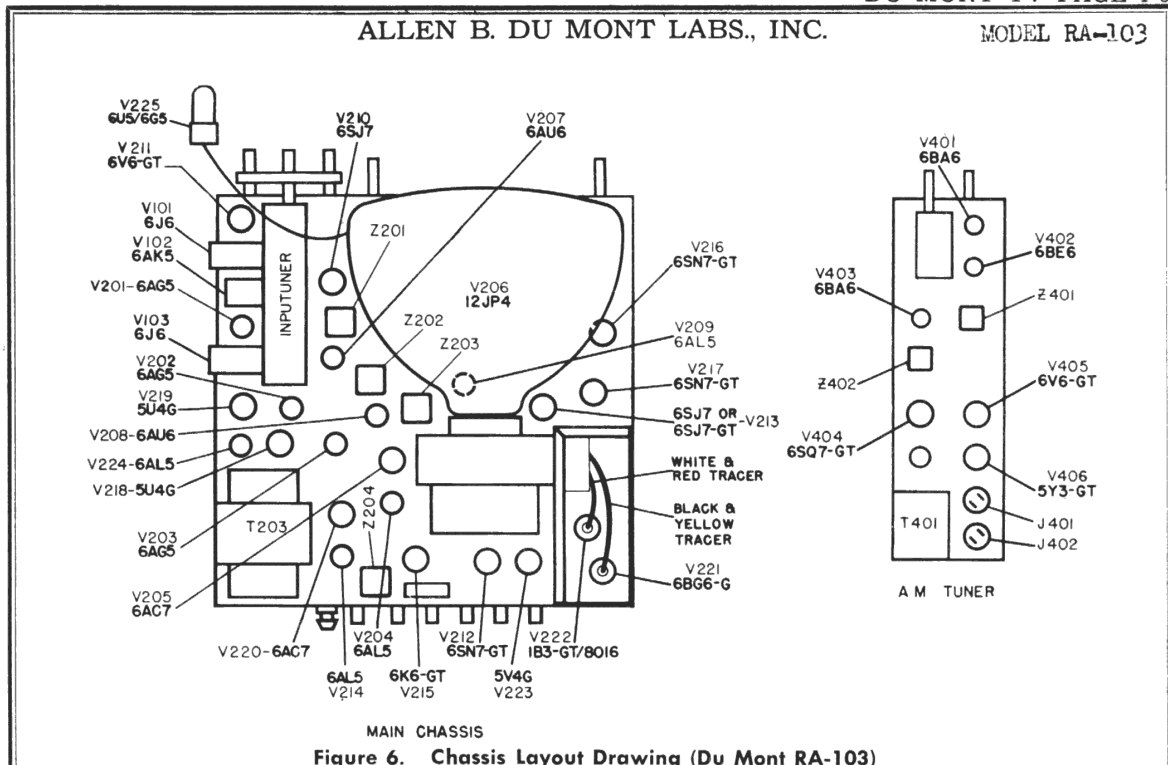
Chassis Layout Drawing (Du Mont RA-103)
